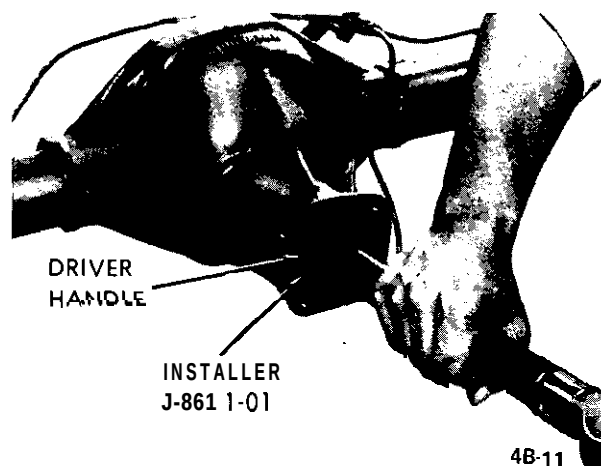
B-11 Installing Front Pinion Bearing Outer Race
